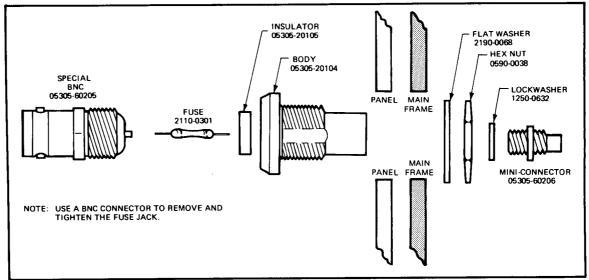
Details of Input Connector J1 and Fuse Mounting
